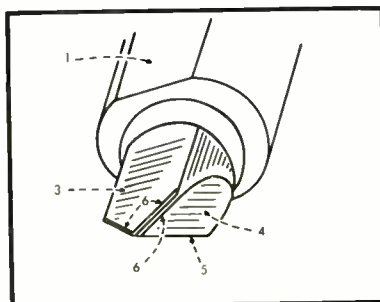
Recording stylus. 1—shank; 3—cutting face; 4—clearance face; 5—back edge; 6—burnishing facets.
